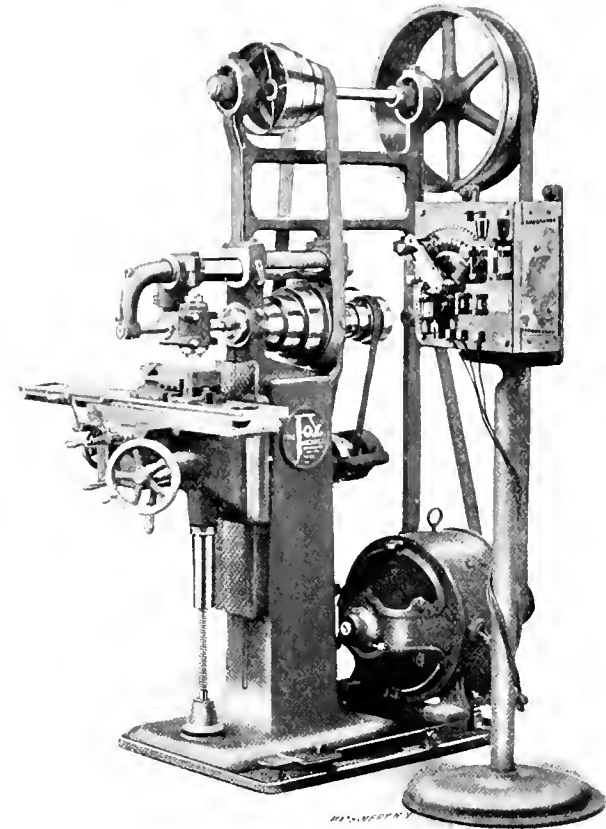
The No. 31-2 Fox Light Miller, arranged for Motor Drive.
